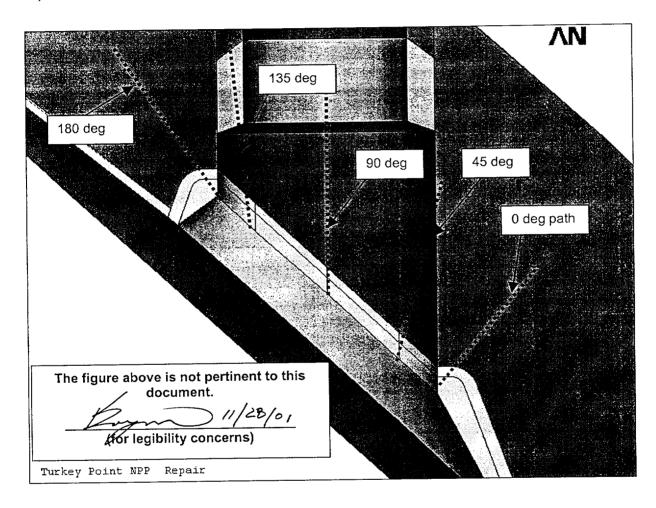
Close-up of Paths Through Original Welds/Head
